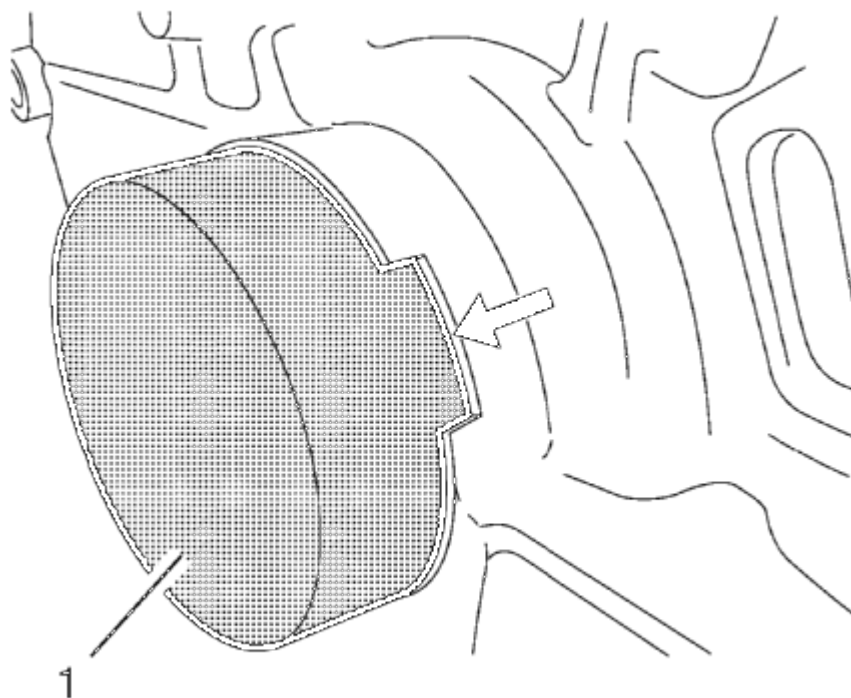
Check Crankshaft Rear Oil Seal For Proper Seat
